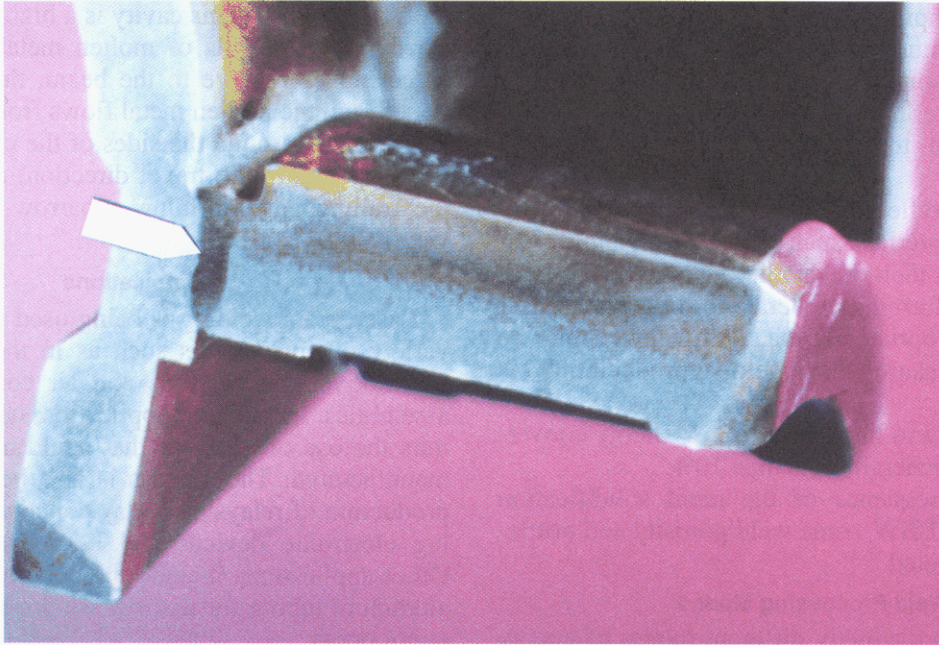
Cross Section of a Laser Beam Weld Joining a Boss to a Ring. A 2.5 kW CO₂ Laser Produced a Travel Speed of 1500 mm/min (60 in./min). Penetration was 4.8 mm (0.181 in.).
